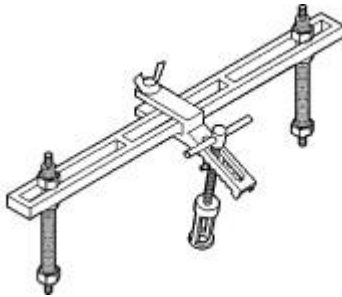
VALVE SPRING COMPRESSOR MD998772A
